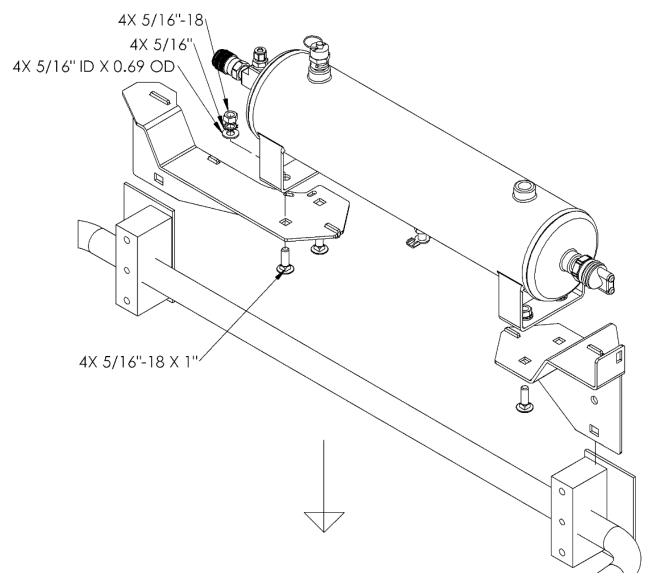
Air Tank and Air Tank Brackets Exploded View
